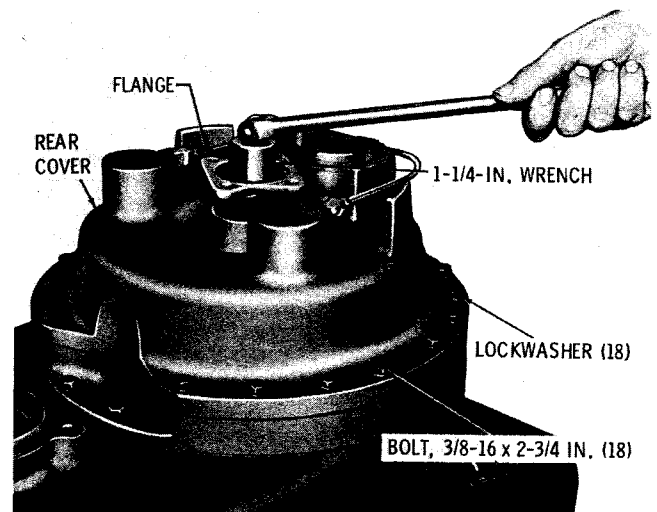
Removing power takeoff flange nut (TTB 2221-1, 2421-1 with converter-driven PTO)
